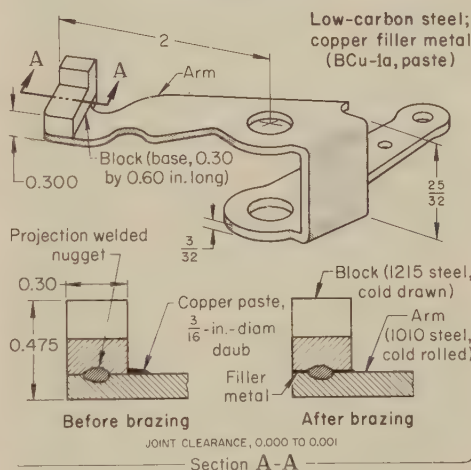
Business-machine assembly to which copper filler metal was applied as a paste (Example 549)
